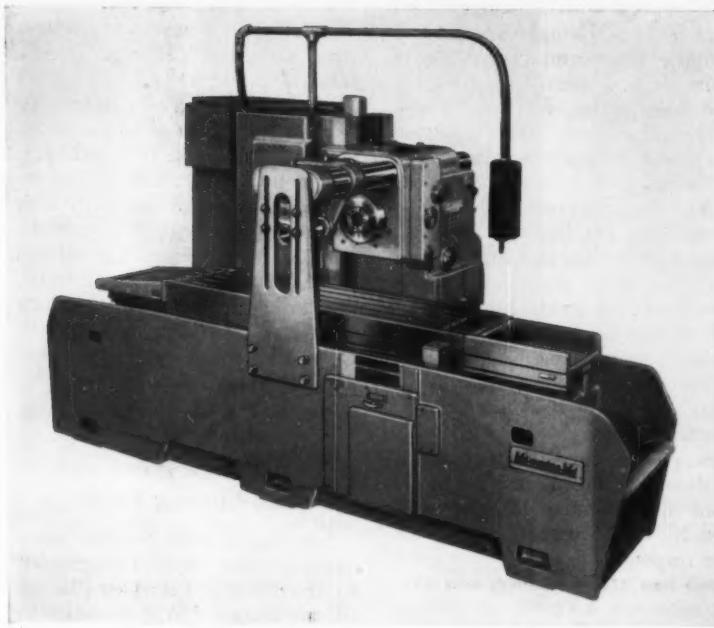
"Milwaukee-Mil" bed type milling machine introduced by Kearney & Trecker Corporation
